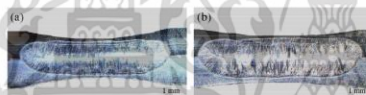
Cross-sectional macrostructure of the weld joint from symmetry of the electrode tip geometry (a) UT R16 – UT R16, (b) UT R30 – LT R 30
